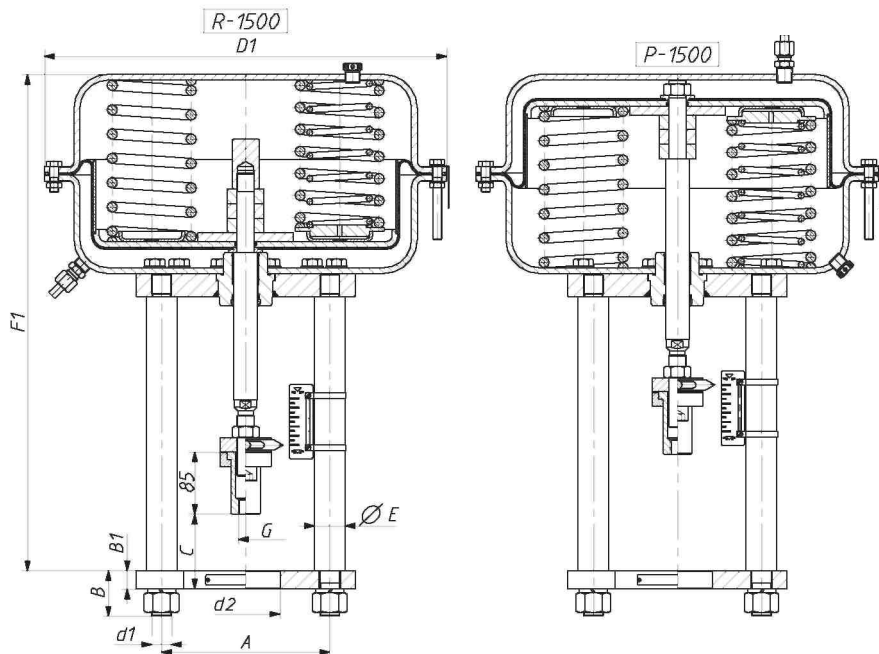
Type P/R 1500 pneumatic actuator connection dimensions
